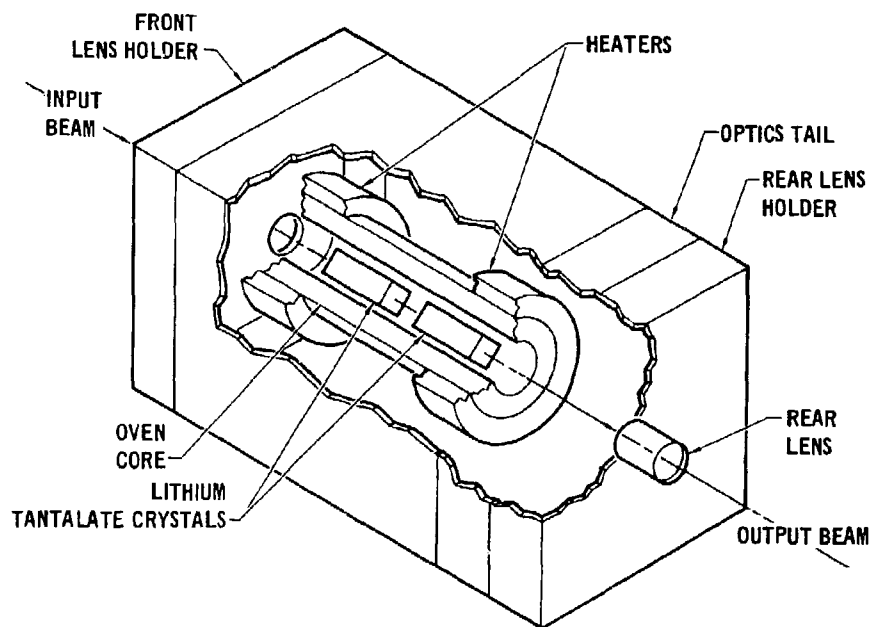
MODULATOR SUBASSEMBLY CUTAWAY VIEW
